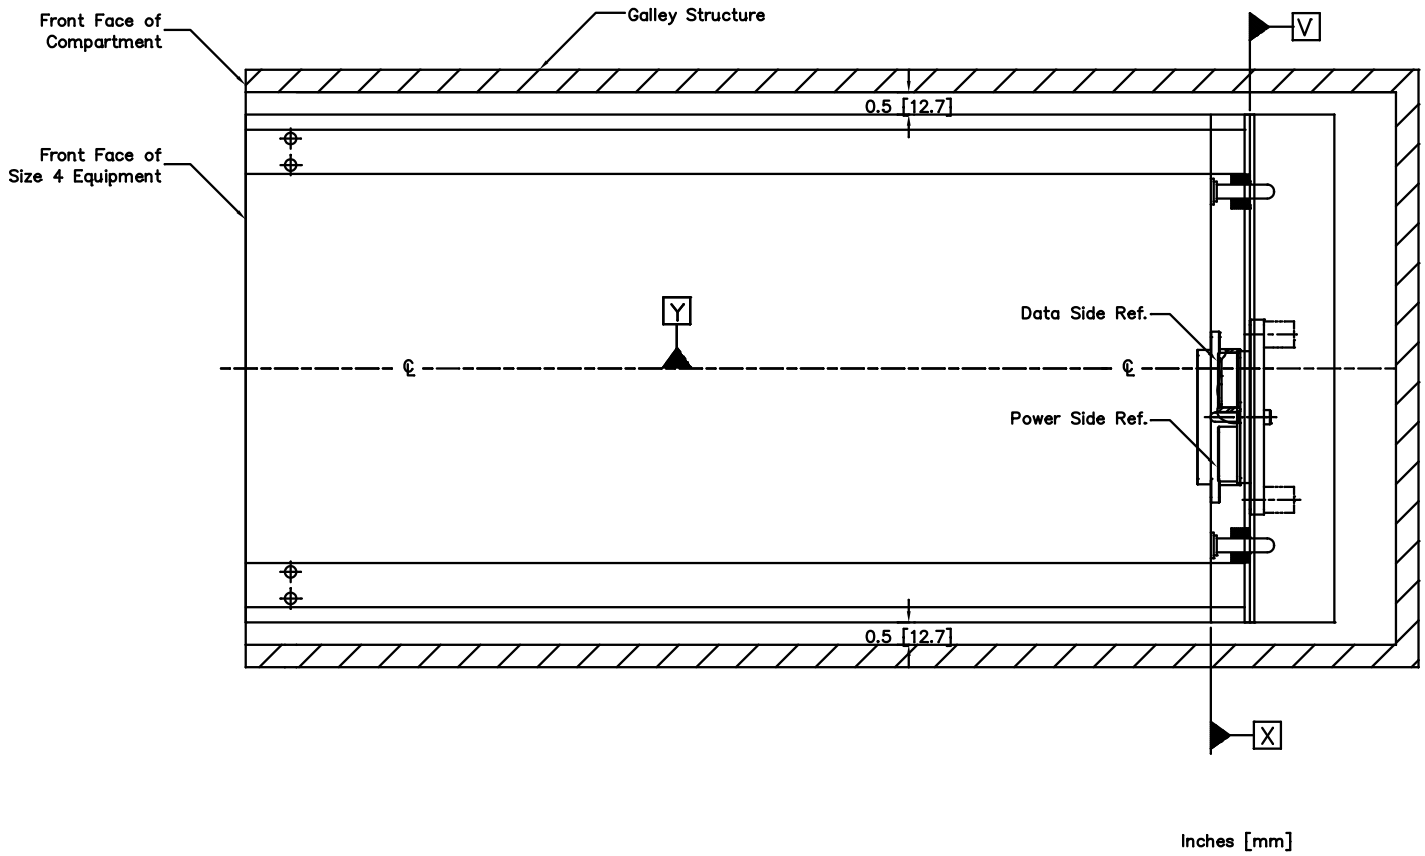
C – GAIN size 4 Compartment and Equipment Installation Details
